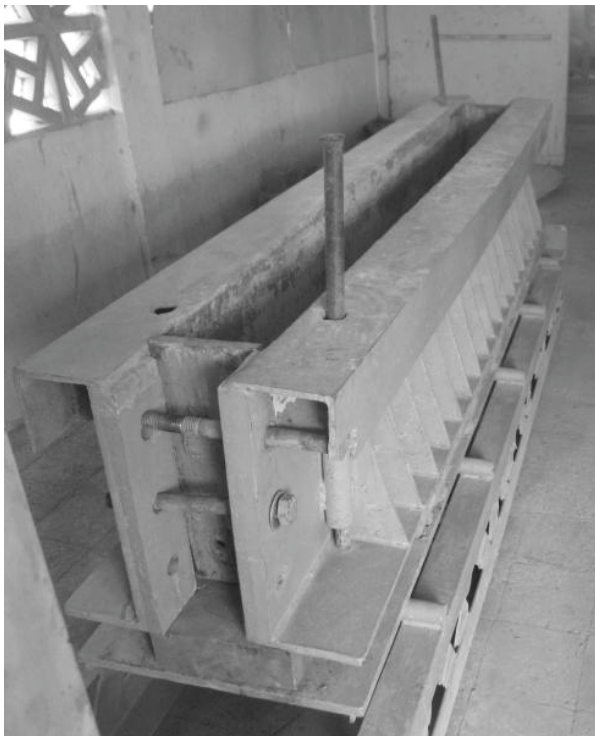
MOULD FOR CASTING OF CLAY BLOCKS
